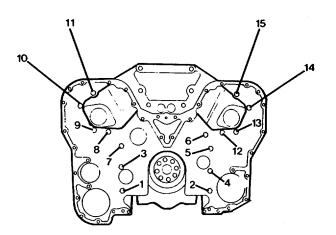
Front Gear Cover Torquing Sequence.
